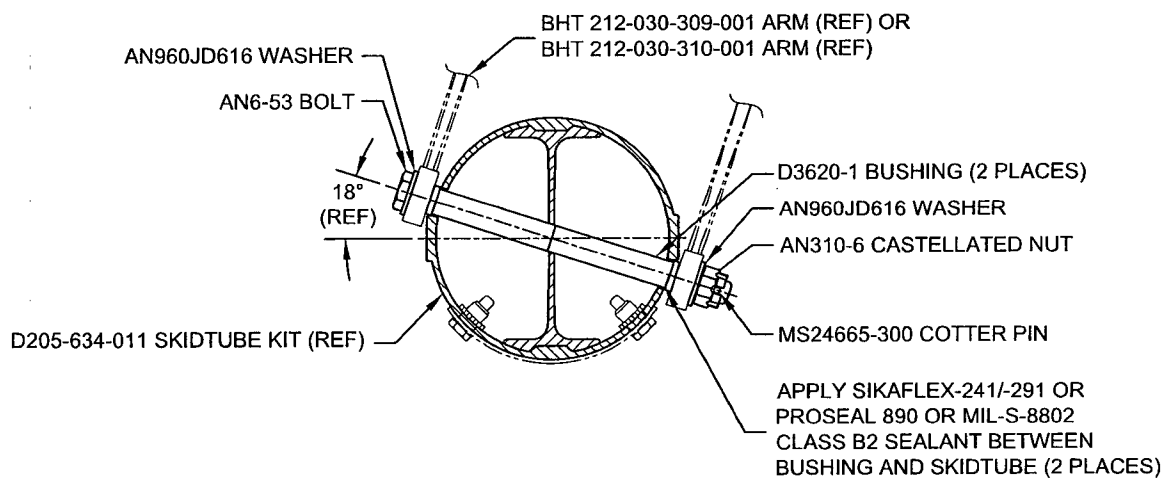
TYPICAL BHT ELECTRIC STEP INSTALLATION
